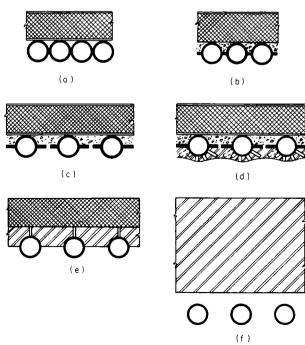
Water-cooled furnace wall construction types. (a) Tangent tube wall; (b) welded membrane tube wall; (c) flat studs welded to sides of tubes; (d) full stud tube wall, refractory-covered; (e) tube and tile wall; (f) tubes spaced from refractory wall.
